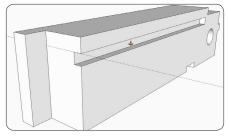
Use the Push/Pull Tool to make the cutout for the groove. Type a value to give the groove a precise length.
